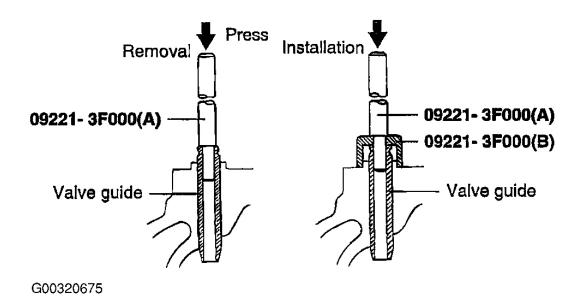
Illustrating Valve Guide Installation Tool Courtesy of KIA MOTORS AMERICA, INC.
